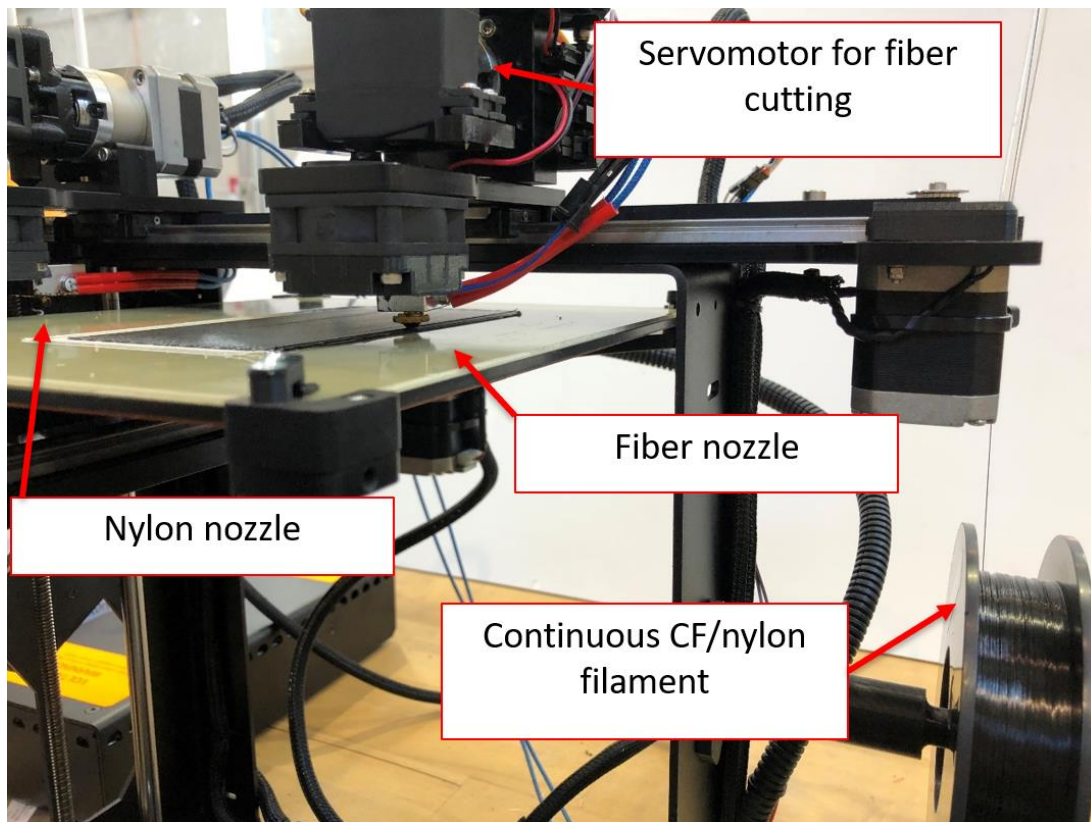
Cartesian 3D printer modified to print continuous carbon fiber reinforced PA6 filament.
